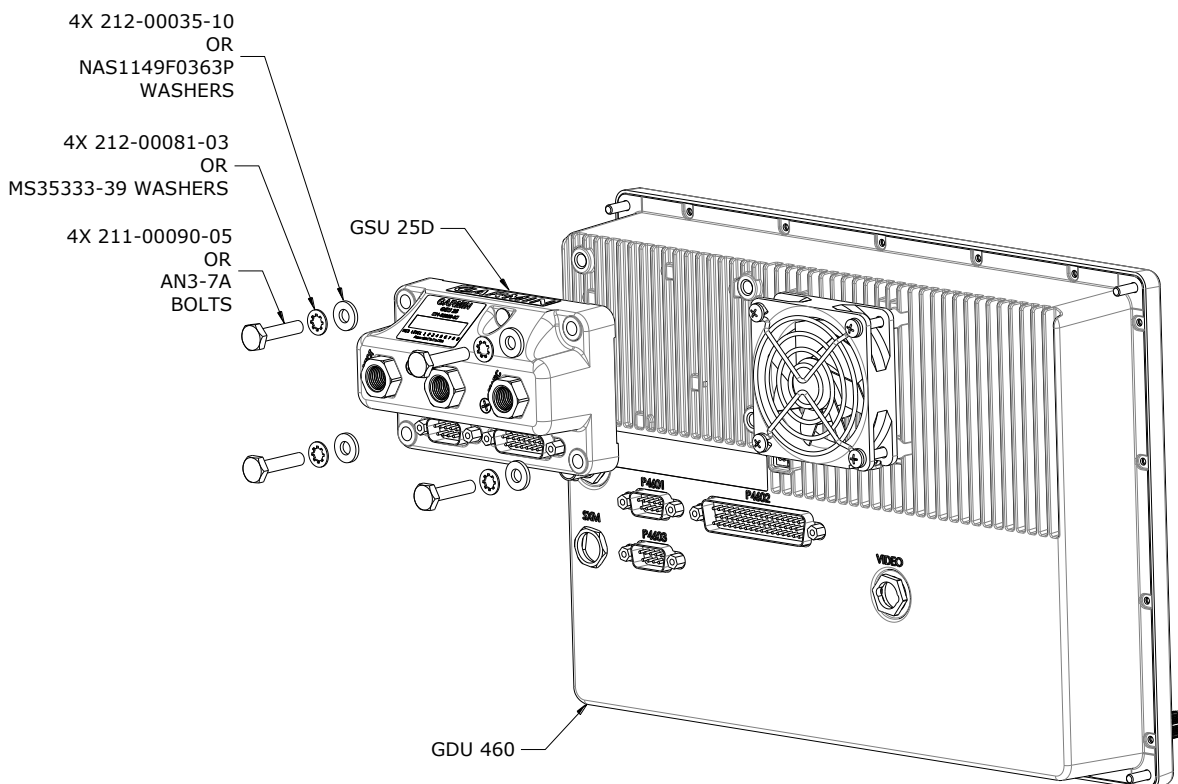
GDU 460-Mounted GSU 25D (GDU 470 similar)
